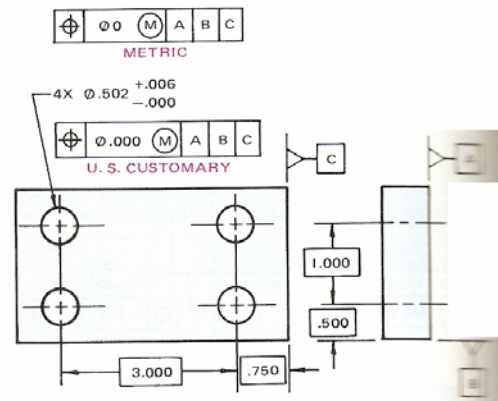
Positional tolerancing—zero MMC.
